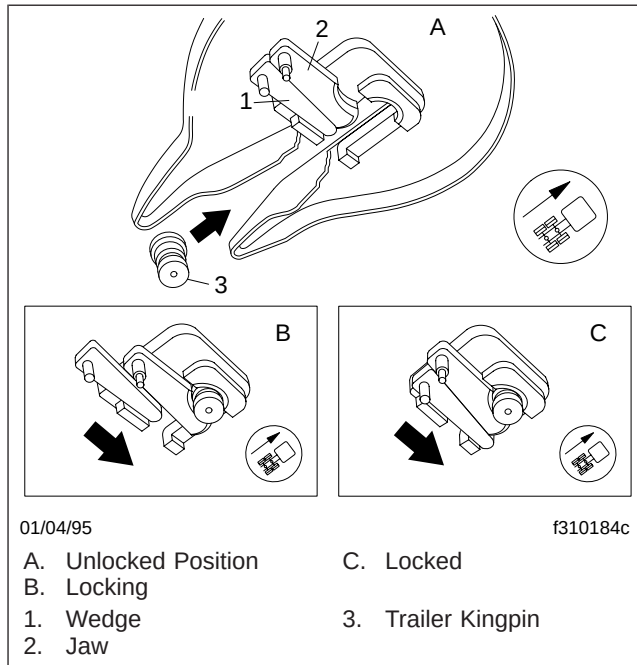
, Fontaine Kingpin Lock Mechanism
